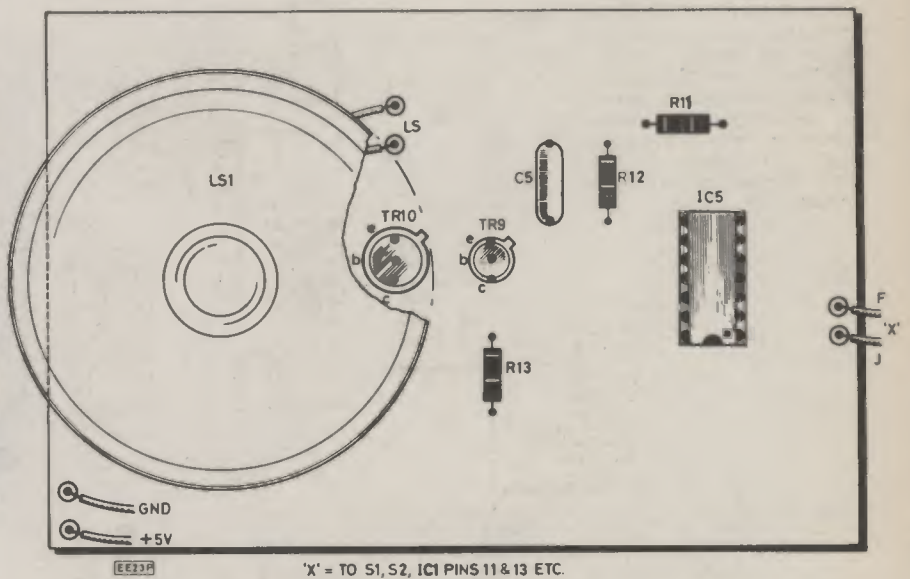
Layout of components on the topside of the Collision/Warning board. The loudspeaker is held in position with impact adhesive.
